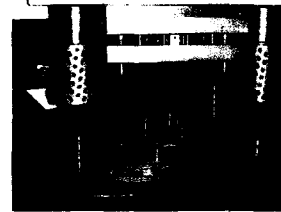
The progressive dies for the manufacturing of the rectangular cup drawing
